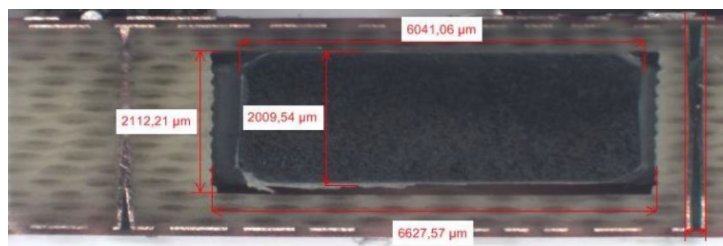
Competitor solution using PCB tracks and electrical vias to form the windings
